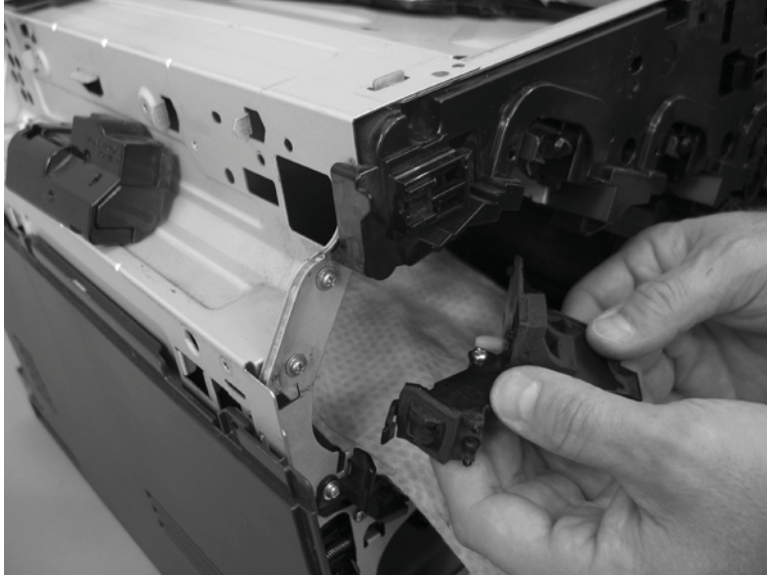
Remove the residual-toner duct and feed assembly (3 of 4)
